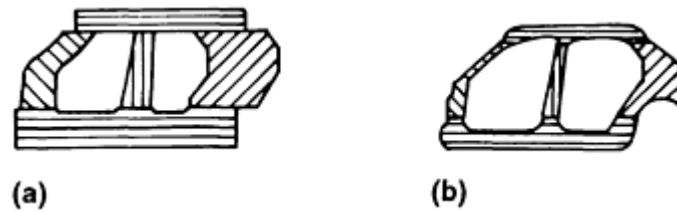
SEQUENCE OF OPERATIONS REQUIRED TO PRODUCE "BODY-IN-WHITE" TAILORED BLANK AUTOMOTIVE BODIES USING LASER-BEAM WELDING. (A) ARRANGEMENT AND WELDING OF DIVIDED-TYPE BODY PANELS BEFORE FORMING. (B) TAILORED BLANK OBTAINED AFTER STRUCTURAL COMPONENTS HAVE BEEN FORMED IN A PRESS. SOURCE: REF 37
